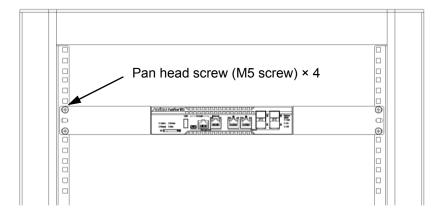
Mounting this device in a 19-inch rack that meets EIA and IEC
